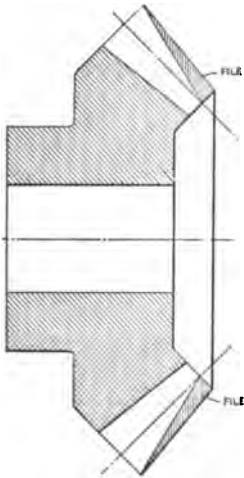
The Surfaces to be Filed in Fitting Bevel Gears Cut with a Formed Cutter
